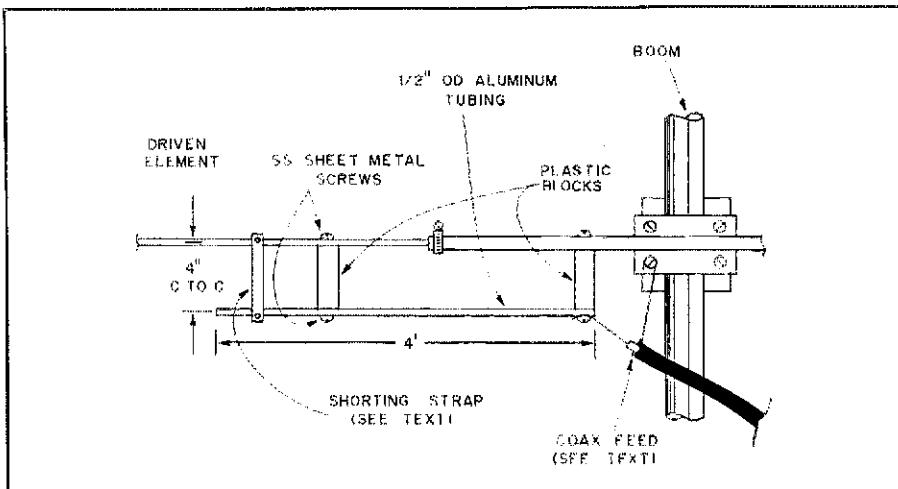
Detail of the gamma matching section for the 12-meter beam. The gamma rod and driven element are spaced 4 inches center to center; the separator blocks have notches cut in each end to seat the element and gamma rod tubing. See the text for details on connecting the feed line to the driven element and how to determine the position of the gamma shorting strap.
